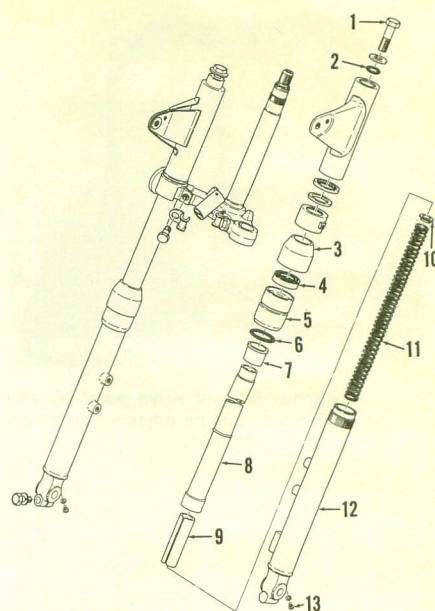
A—Exploded view of front suspension used on models CS5 and RD200A.
